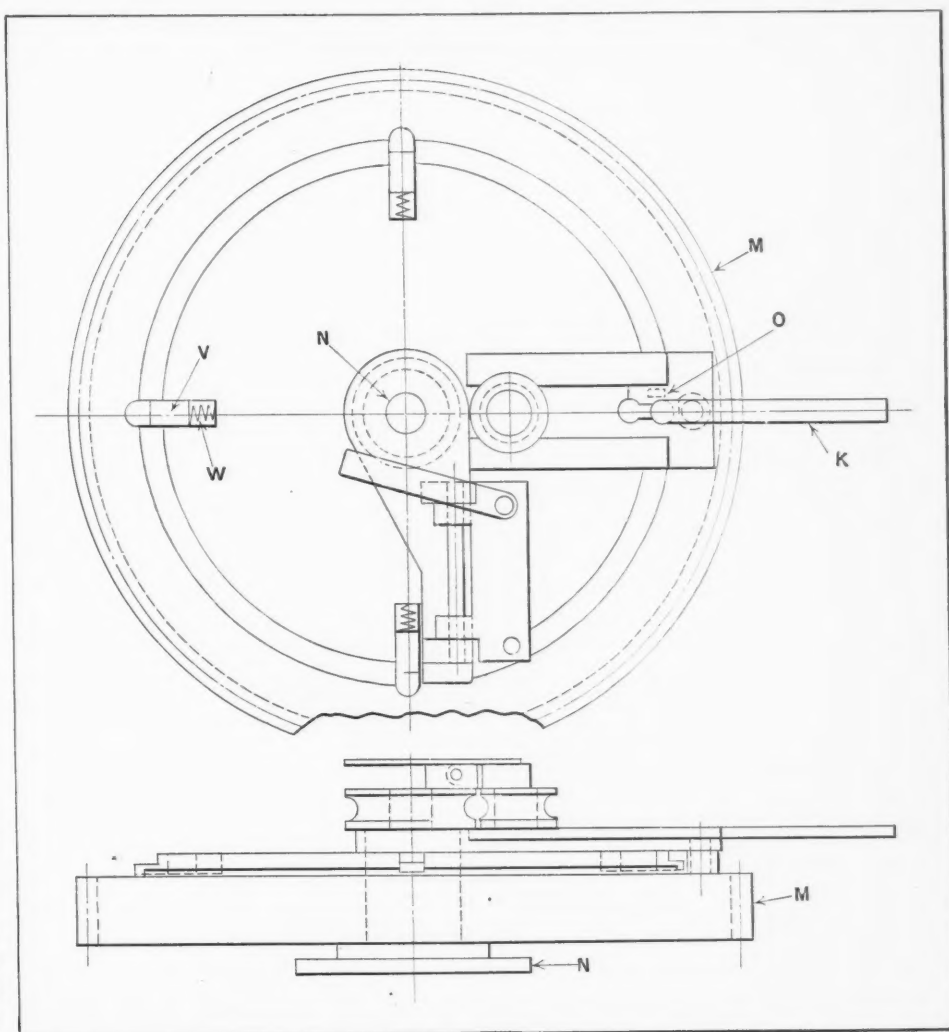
Assembly of Clamping, Bending, and Driving-gear Members of Pipe-bending Machine
